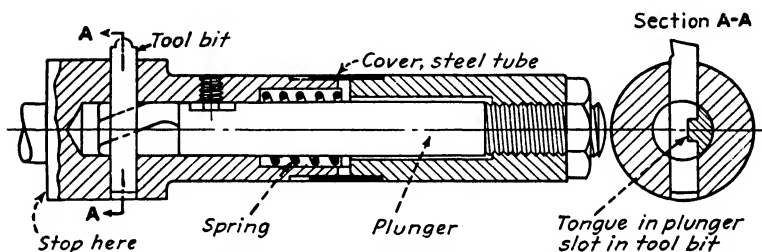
Here the tool is forced sideways when the holder bottoms in the hole.
